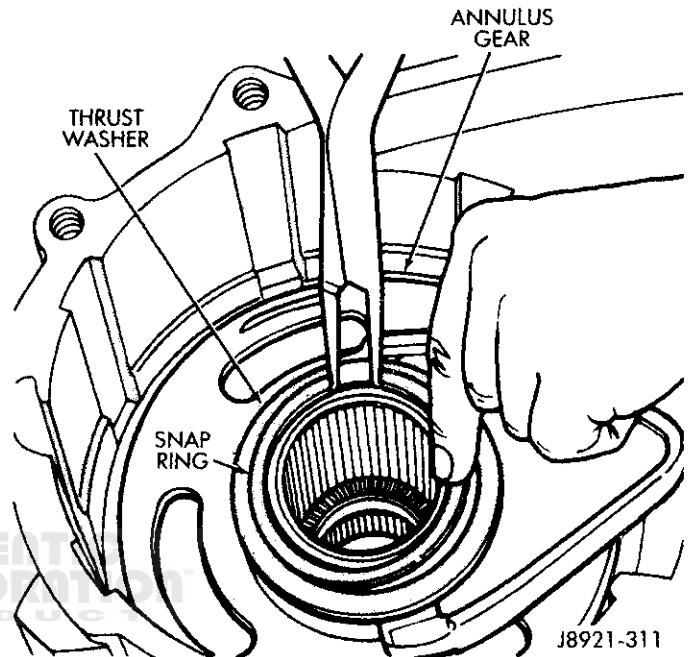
Removing Annulus Gear Snap Ring And Thrust Washer
